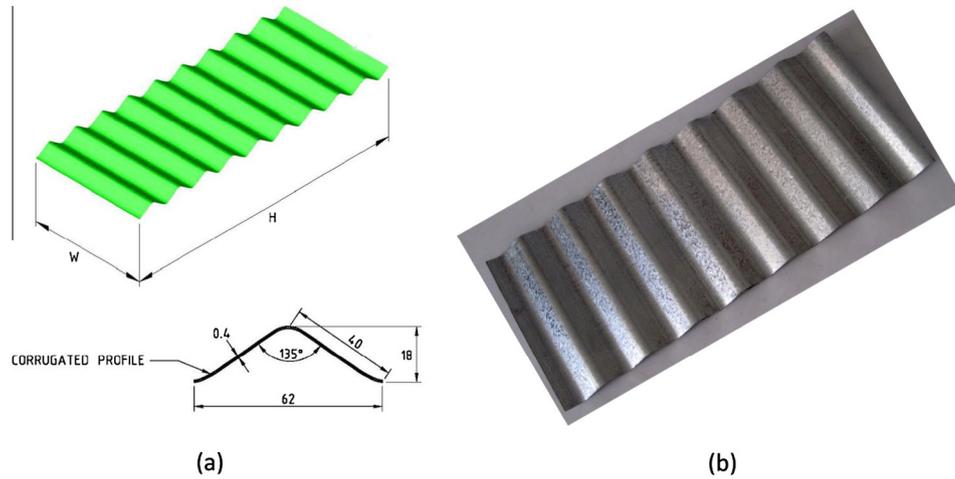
(a) Geometric details of the heat exchanger plates and (b) a photograph of one of the plates.
